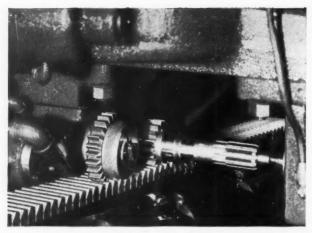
The 24-tooth highspeed gear and the 17tooth drive gear, both seven-pitch, are tandem shaved on another one of the Michigan Tool rack shavers at Detroit Gear Division.
